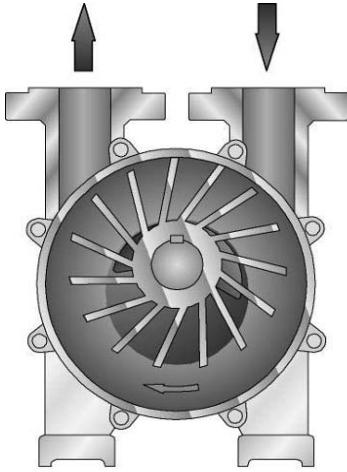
Section through a liquid-ring vacuum pump, Dr.-Ing. K. Busch GmbH
